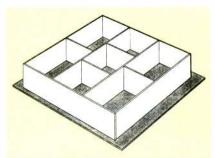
SIMPLE E-FIELD SHIELDS for radio-frequency hacker projects are easily built up from pieces of double-sided printed circuit board stock.
